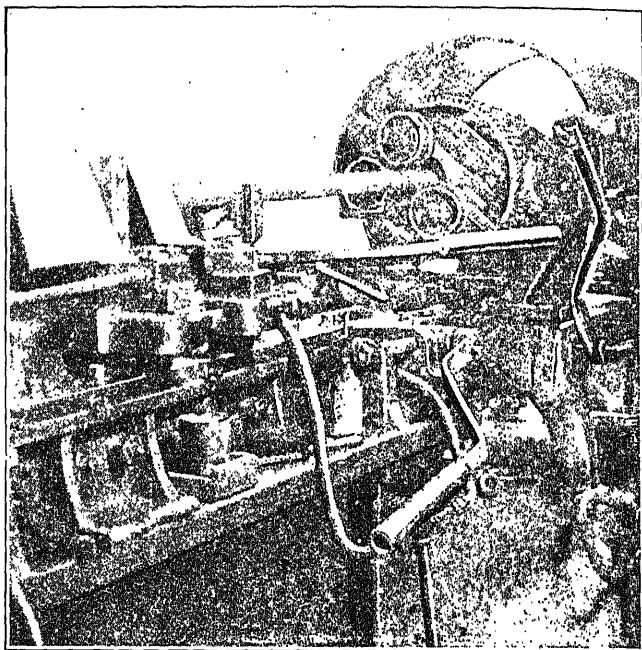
The Three-Roller, or Hartz Type, Machine.
